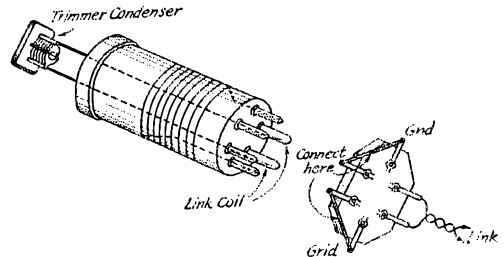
WIRING ARRANGEMENT FOR EASY REMOVAL OF TRIMMER CONDENSERS MOUNTED IN COIL FORM
